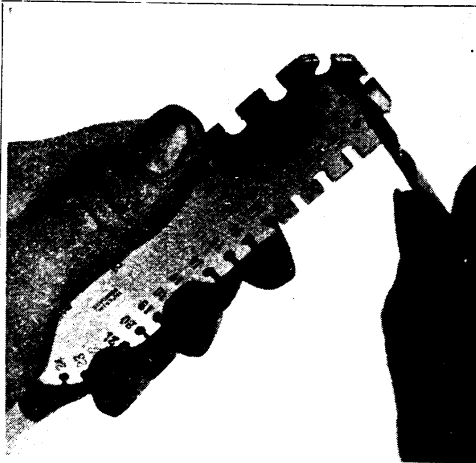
Gauges are made for wire-testing which serve the same purpose for drills. A gauge is shown in use with a twist drill
